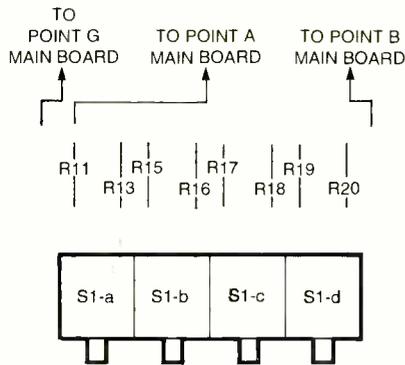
SWITCH S2 and 12 precision resistors mount on the sub board.
